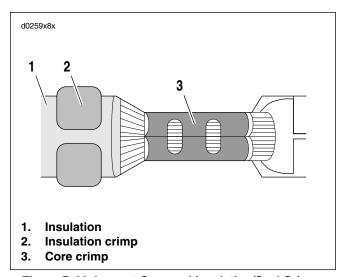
Inspect Core and Insulation/Seal Crimps
